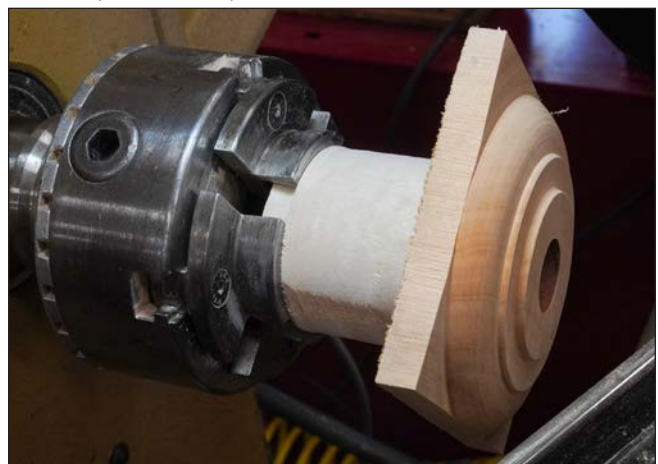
Sand and seal the base after shaping, while access to these surfaces is at its best.
